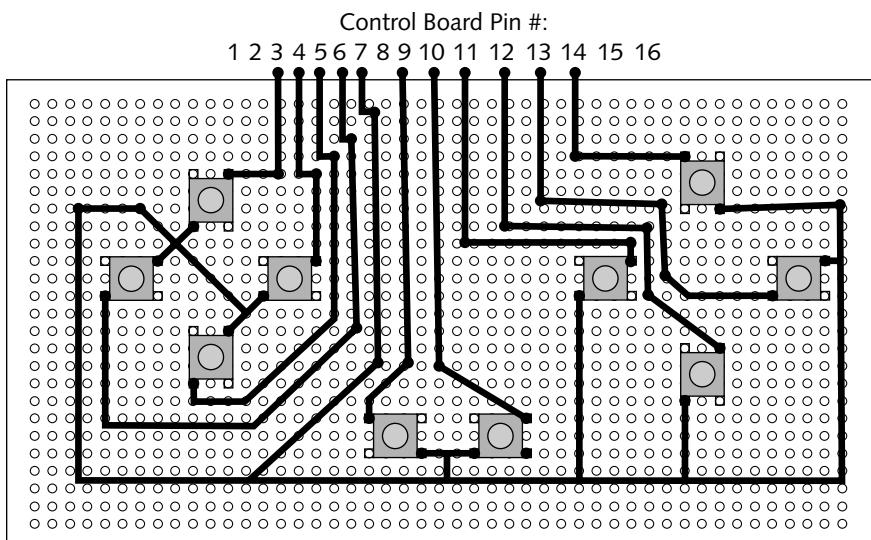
Sample PSOne controller on a piece of PC board.
